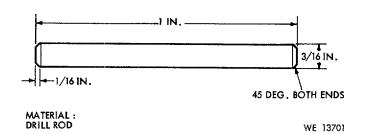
Improvised tool for assembly and installation of hammer and cocking lever.
